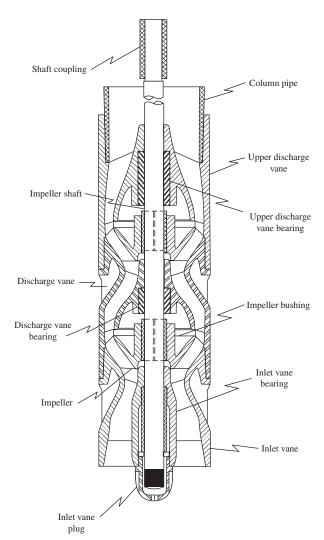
Section of bowls of a vertical turbine pump with open impellers for a connection to open-line shafting.
